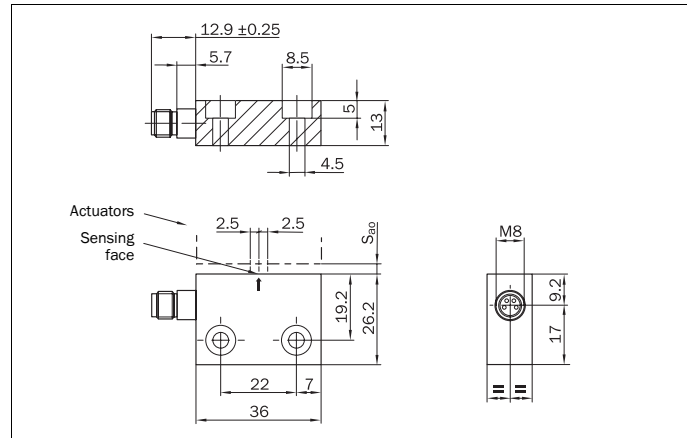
Dimensional drawing RE13-DAC magnetic safety switch
